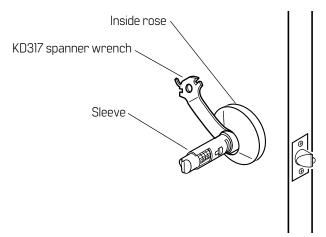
Removing the inside rose with the KD317 spanner wrench
